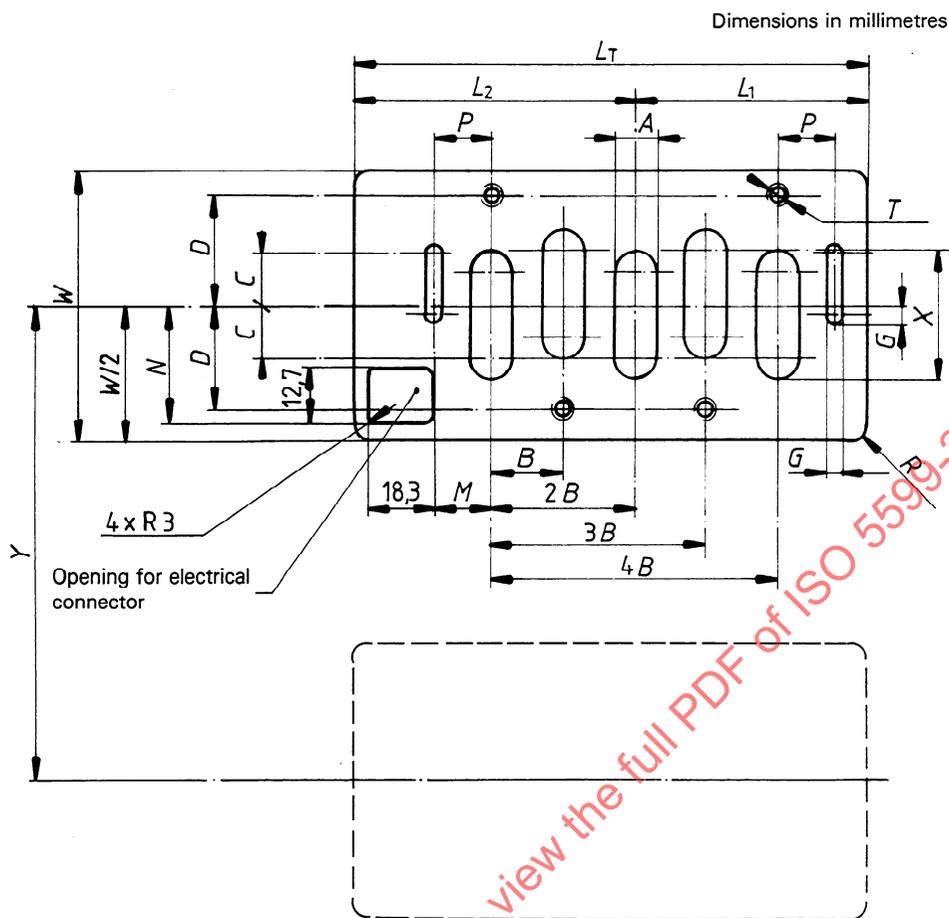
Mounting surface with opening for electrical connector — Sizes 1E, 2E and 3E
